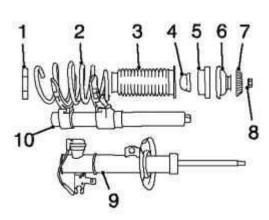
Components of spring rack: 1 - the bottom bracket, 2 - spring, 3 - bearing springs, 4 - limiter, 5 - supporting bearing, 6 - plate springs; 7 - damper ring; 8 - supporting bearing; 9 - front desk, 10 - a special tool
